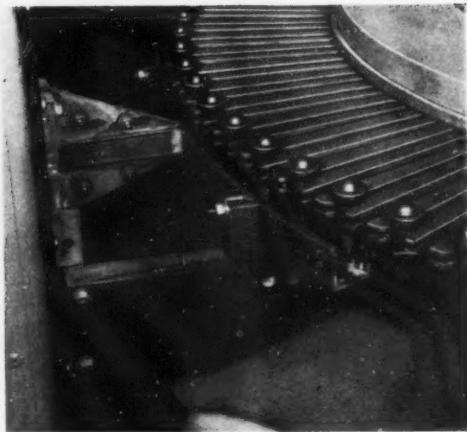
The Channel-shaped Inductor Used on the Tocco Machine. Ball Studs are Annealed at the Rate of 3,226 per Hour
